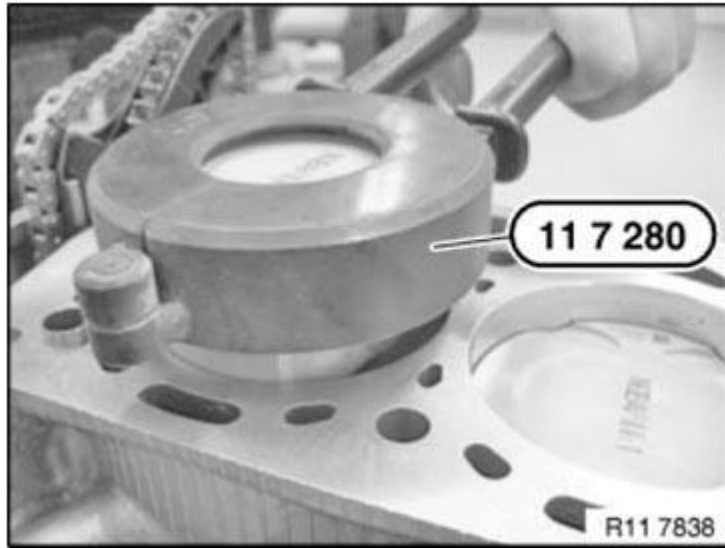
Compressing Piston Rods With Special Tool 11 7 280
